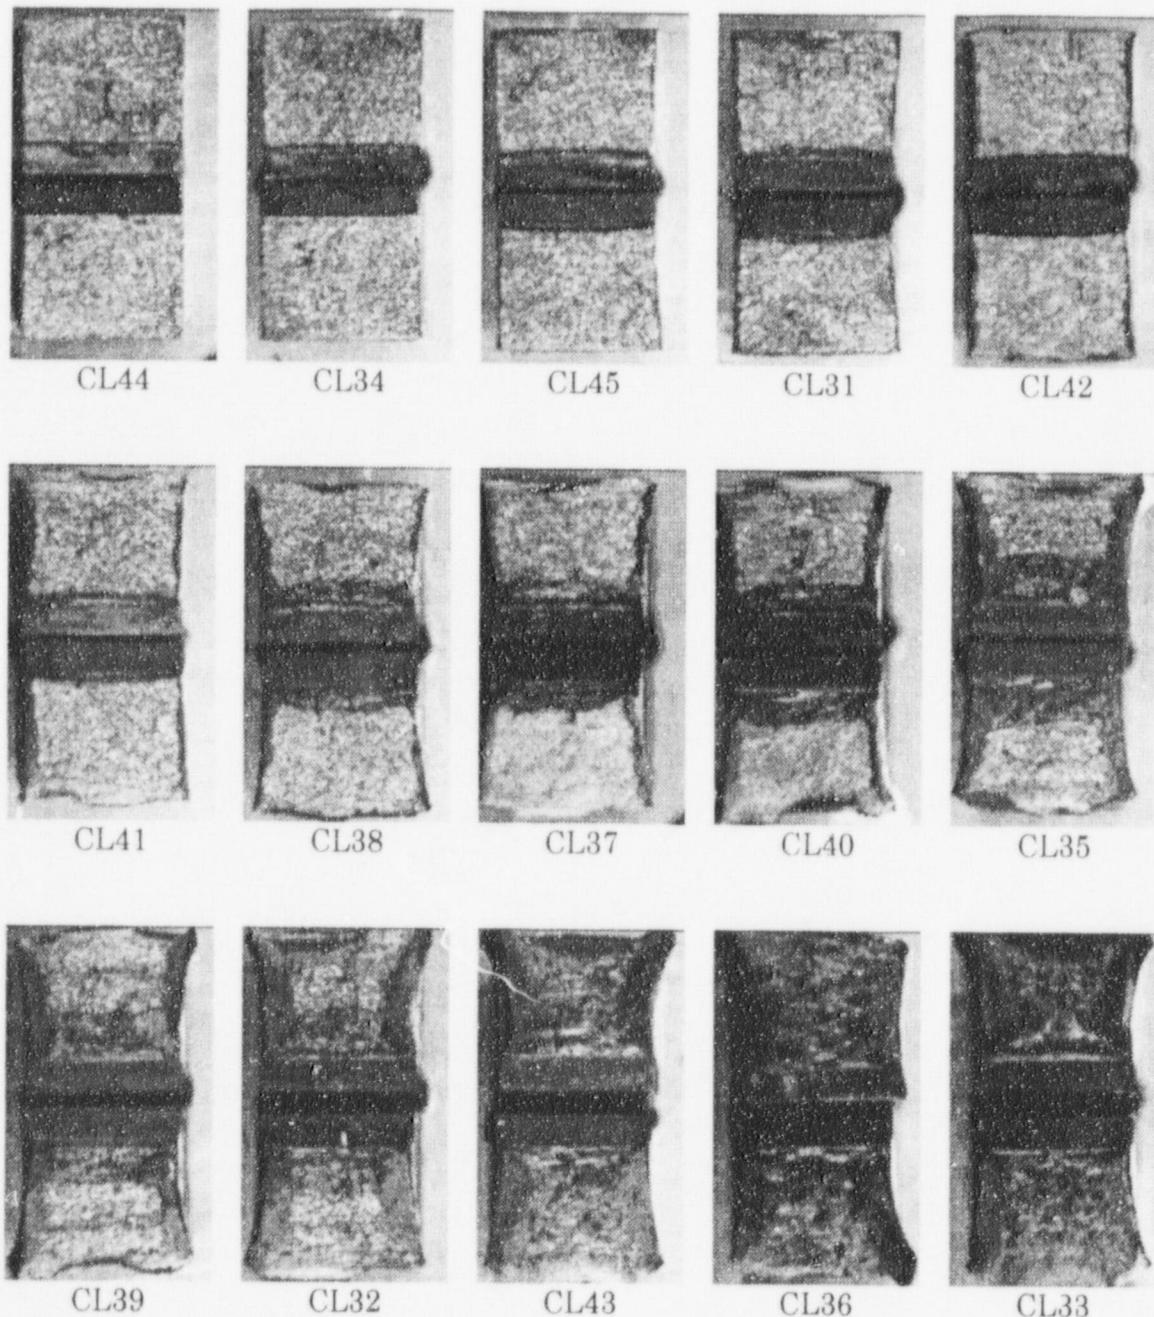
Charpy Impact Specimen Fracture Surfaces for V.C. Summer Unit 1 Reactor Vessel Intermediate Shell Plate A9154-1 (Longitudinal Orientation)
